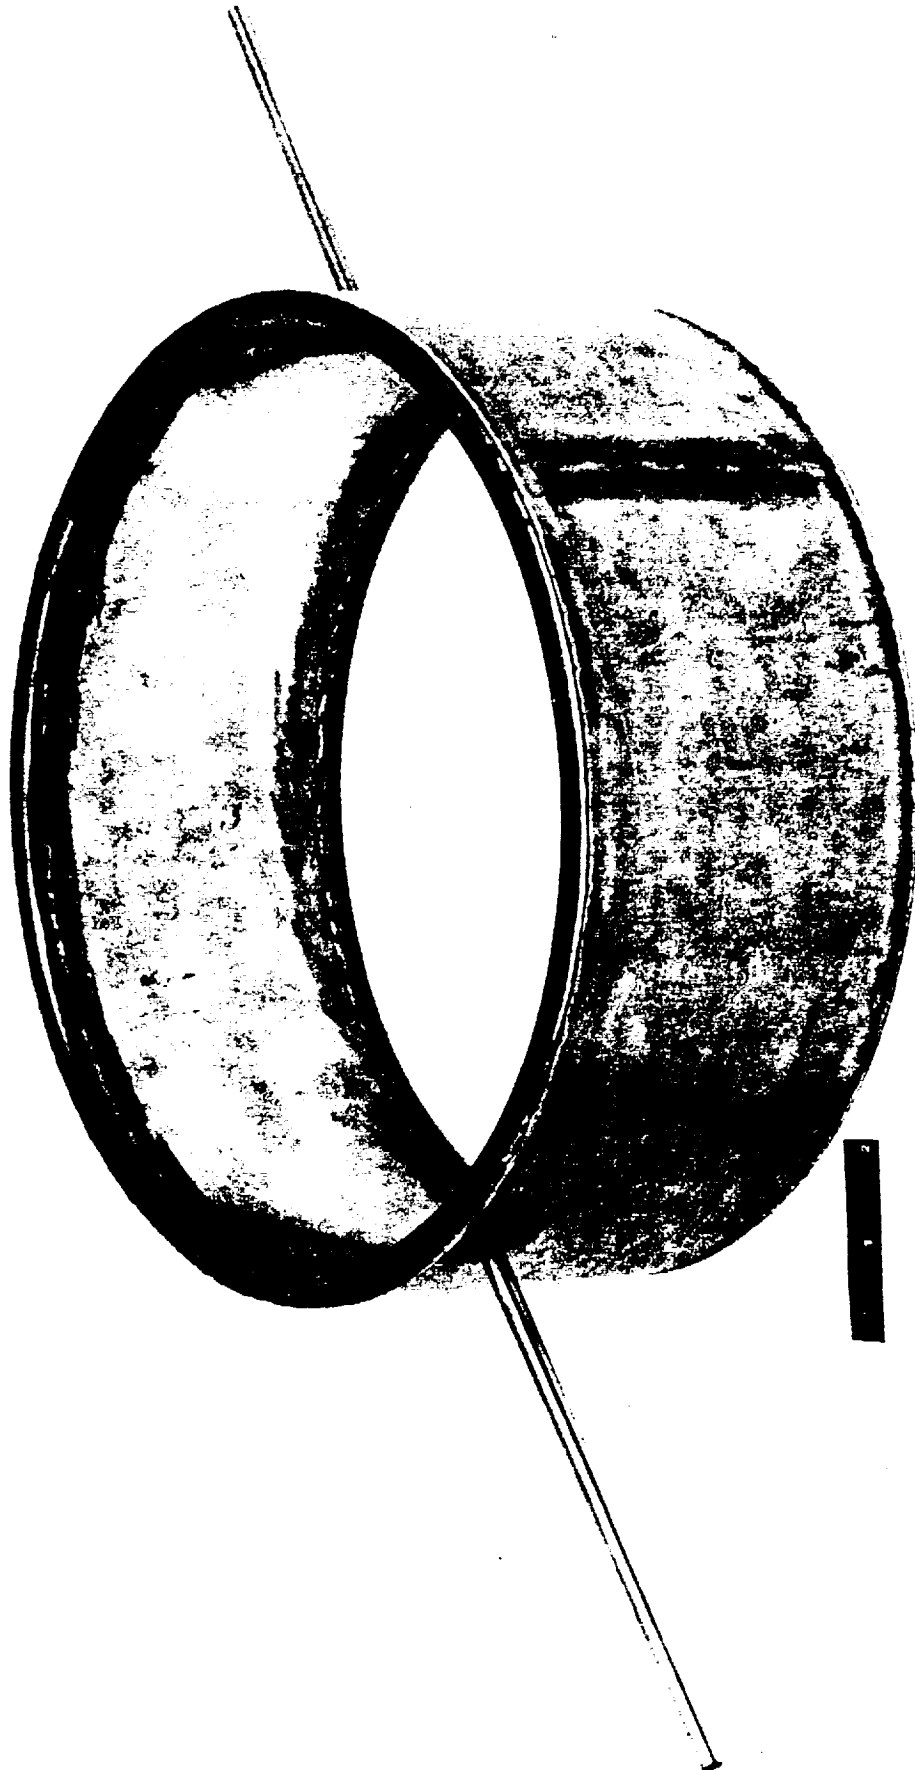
Cylindrical Lag-Braze Sample Assembly
